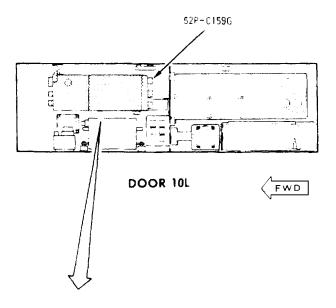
Wing Tank Fuel Transfer System Component Locator (Sheet 1 of 2)
